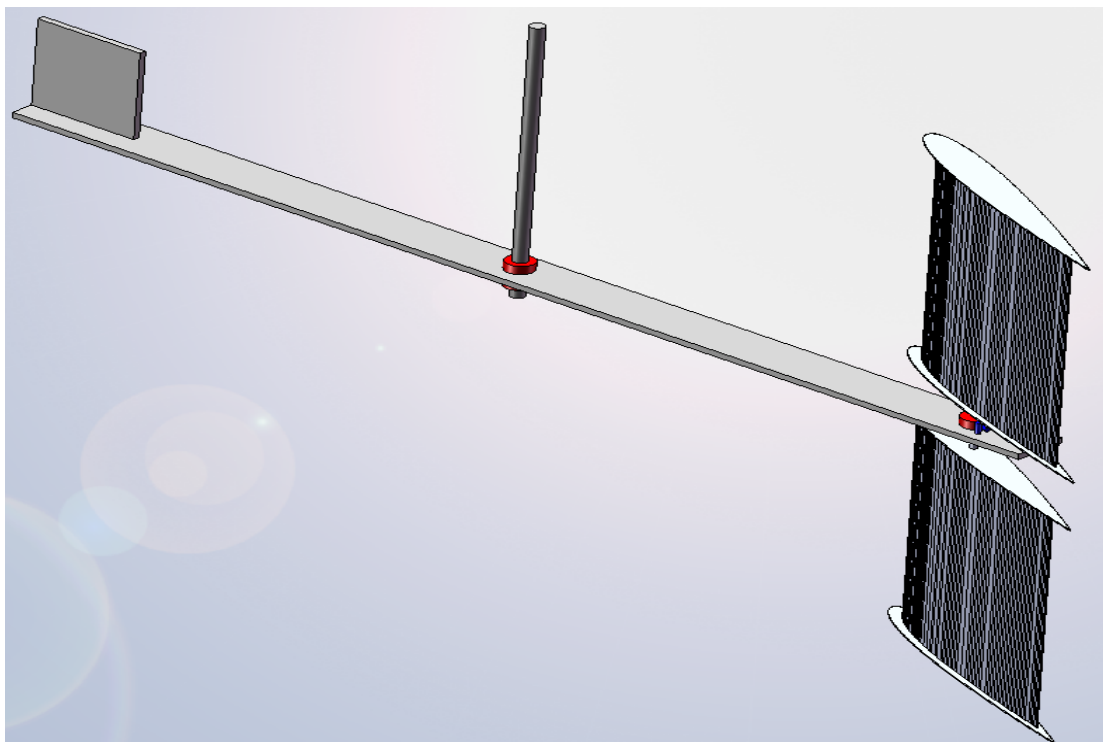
CAD Drawing of Oscillating Water Current Turbine
